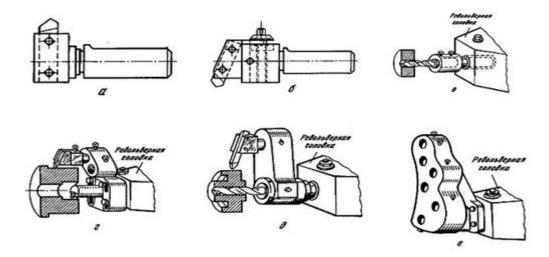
Holders for lathe revolving machines: a, b, c - one-seater; g, d - combined; e - multidimensional
